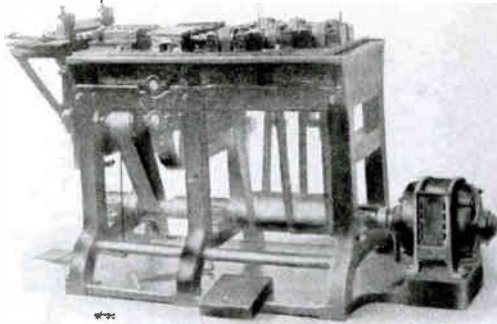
5 H.P. Induction Motor Direct Connected to Driving Shaft of 6-Spindle Automatic Dowel Boring Machine
